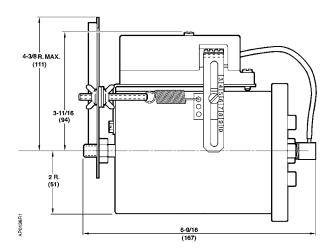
No. 3 Actuator with the RL 147 Positioning Relay Mounted Dimensions. Dimensions in Inches (Millimeters).
